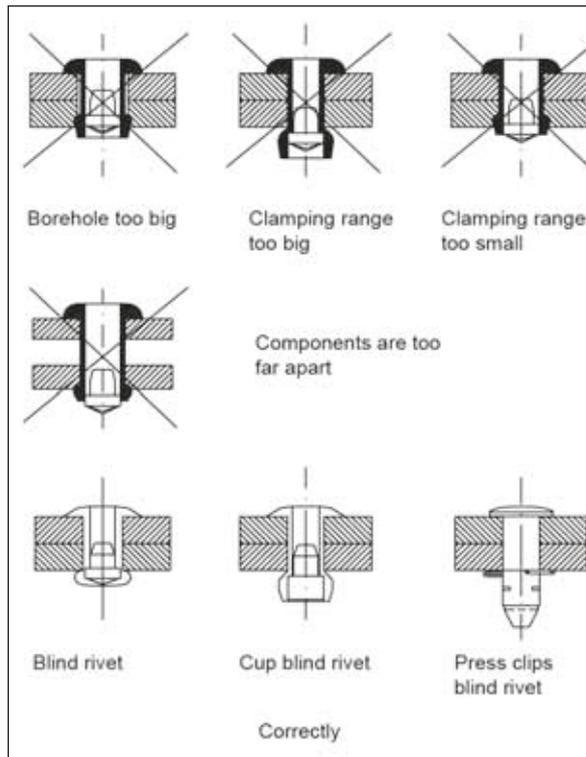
Design of rivet connections (s. also IFBS assembly guidelines)
